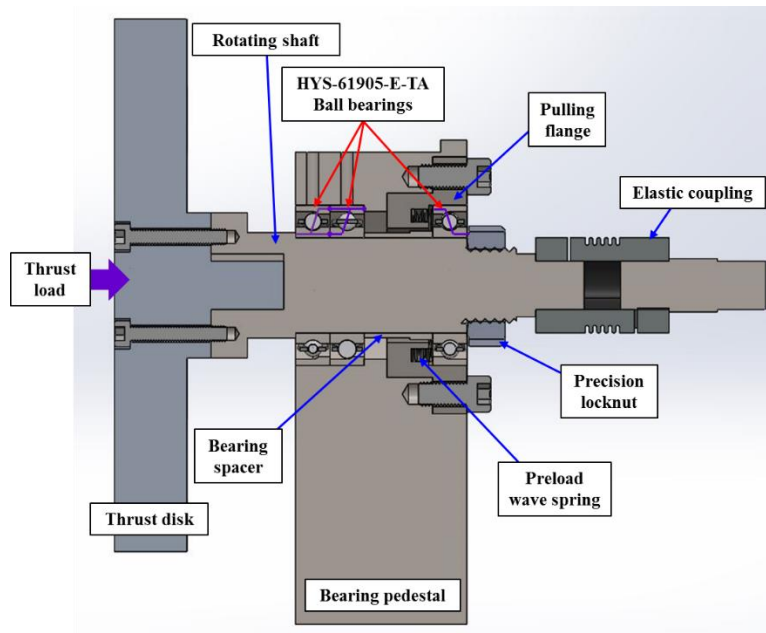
Cut section view of a bearing pedestal and rotating shaft assembly indicating the direction of the thrust load and load path through the ball bearings.
